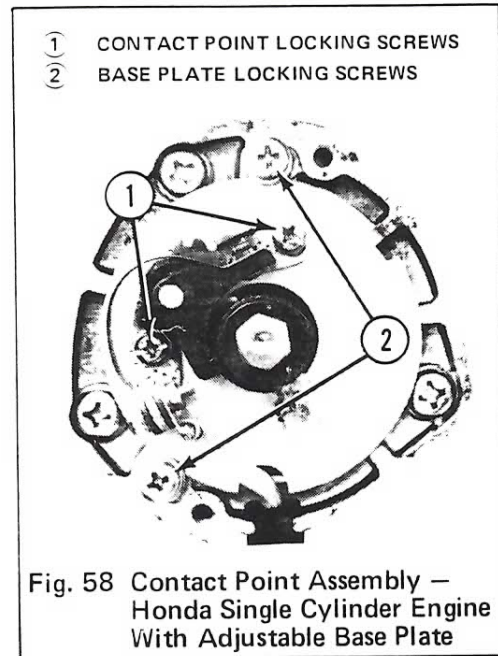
Contact Point Assembly — Honda Single Cylinder Engine With Adjustable Base Plate
